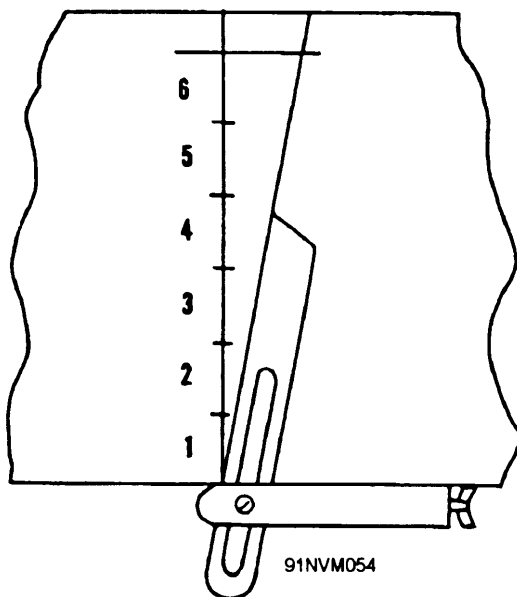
Laying off a 10-degree angle for a dovetail joint.
